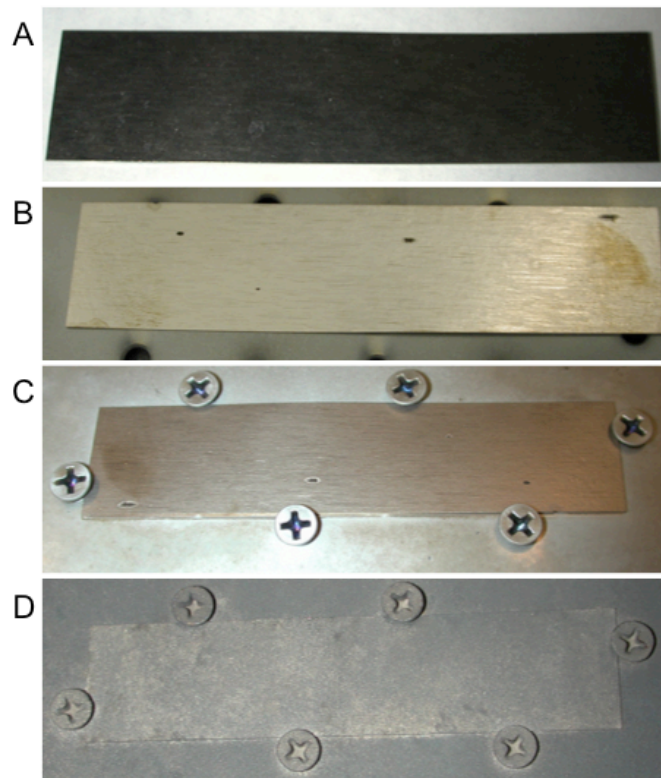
A) Photograph of rolled DU-10Mo with black oxide surface. B) Bare DU-10Mo foil after chemical cleaning. C) Bare DU-10Mo foil mounted in plasma spray chamber holder. D) DU-10Mo foil following Zr plasma spray coating.
